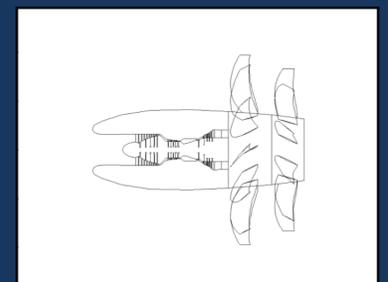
3-shaft geared open rotor (with TP400 performance)
